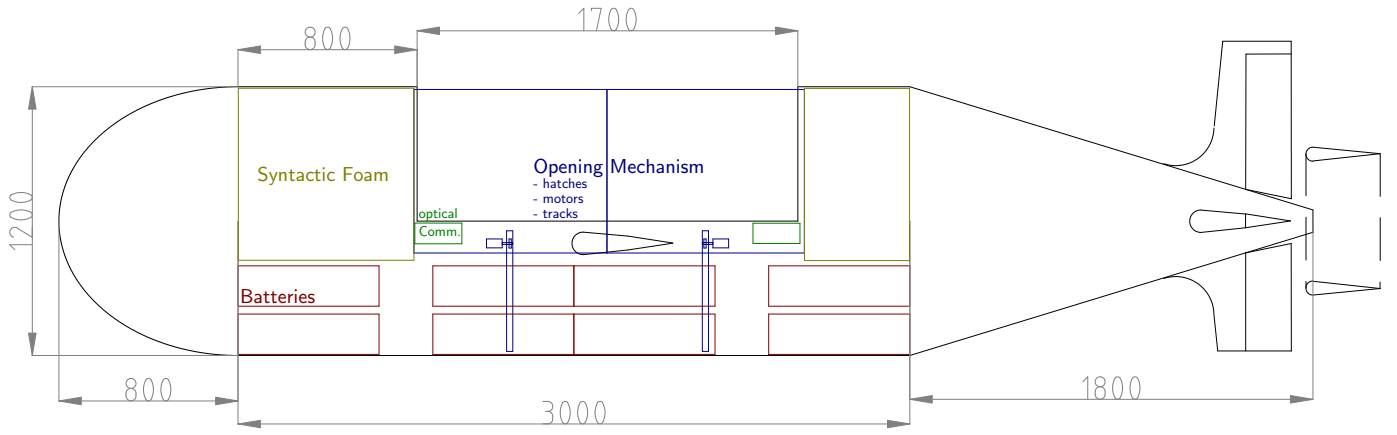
Lengthwise drawing of the Pipefish with measurements in [mm] and details on the mid-section layout.
